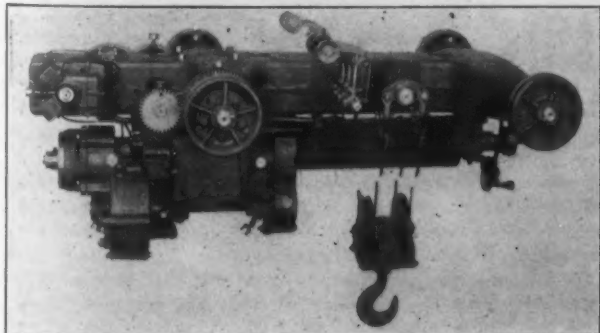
A Special Electric Hoist for Handling Cores and Pipes.
